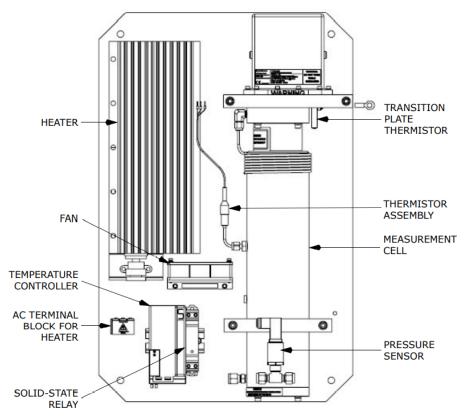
Components on sample cell panel assembly (8/28 m sample cell) (lower level)
